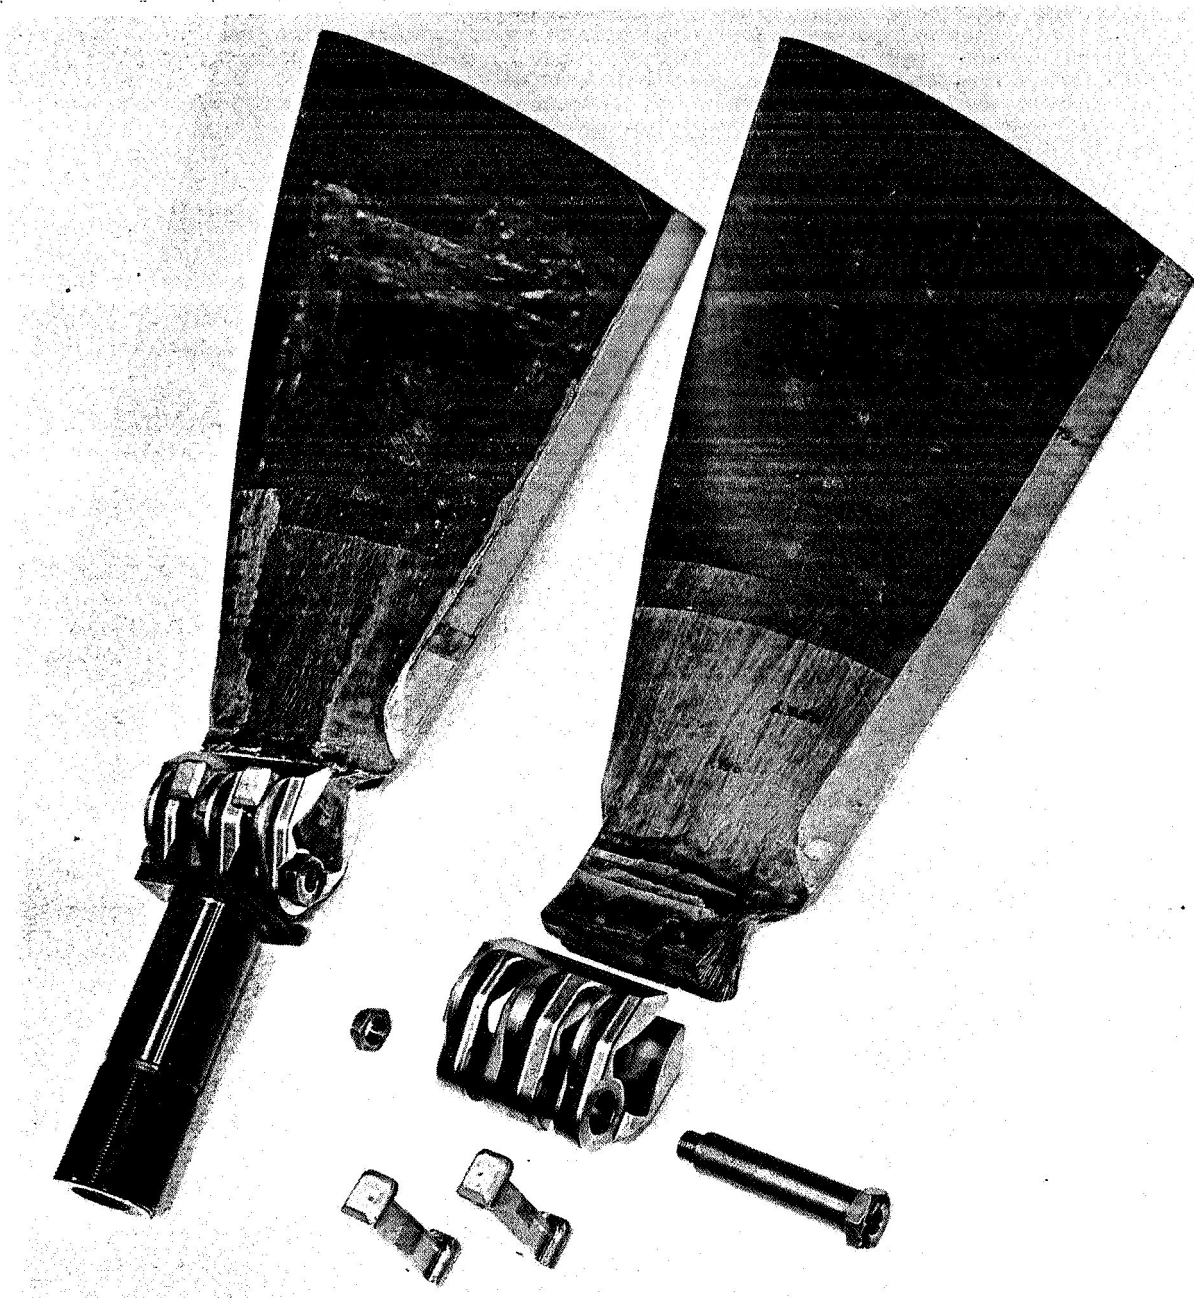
Pin Root Blade Parts and Assembled Blade. Note: Only One of Two Required Slots has Been Machined on Unassembled Blade.
